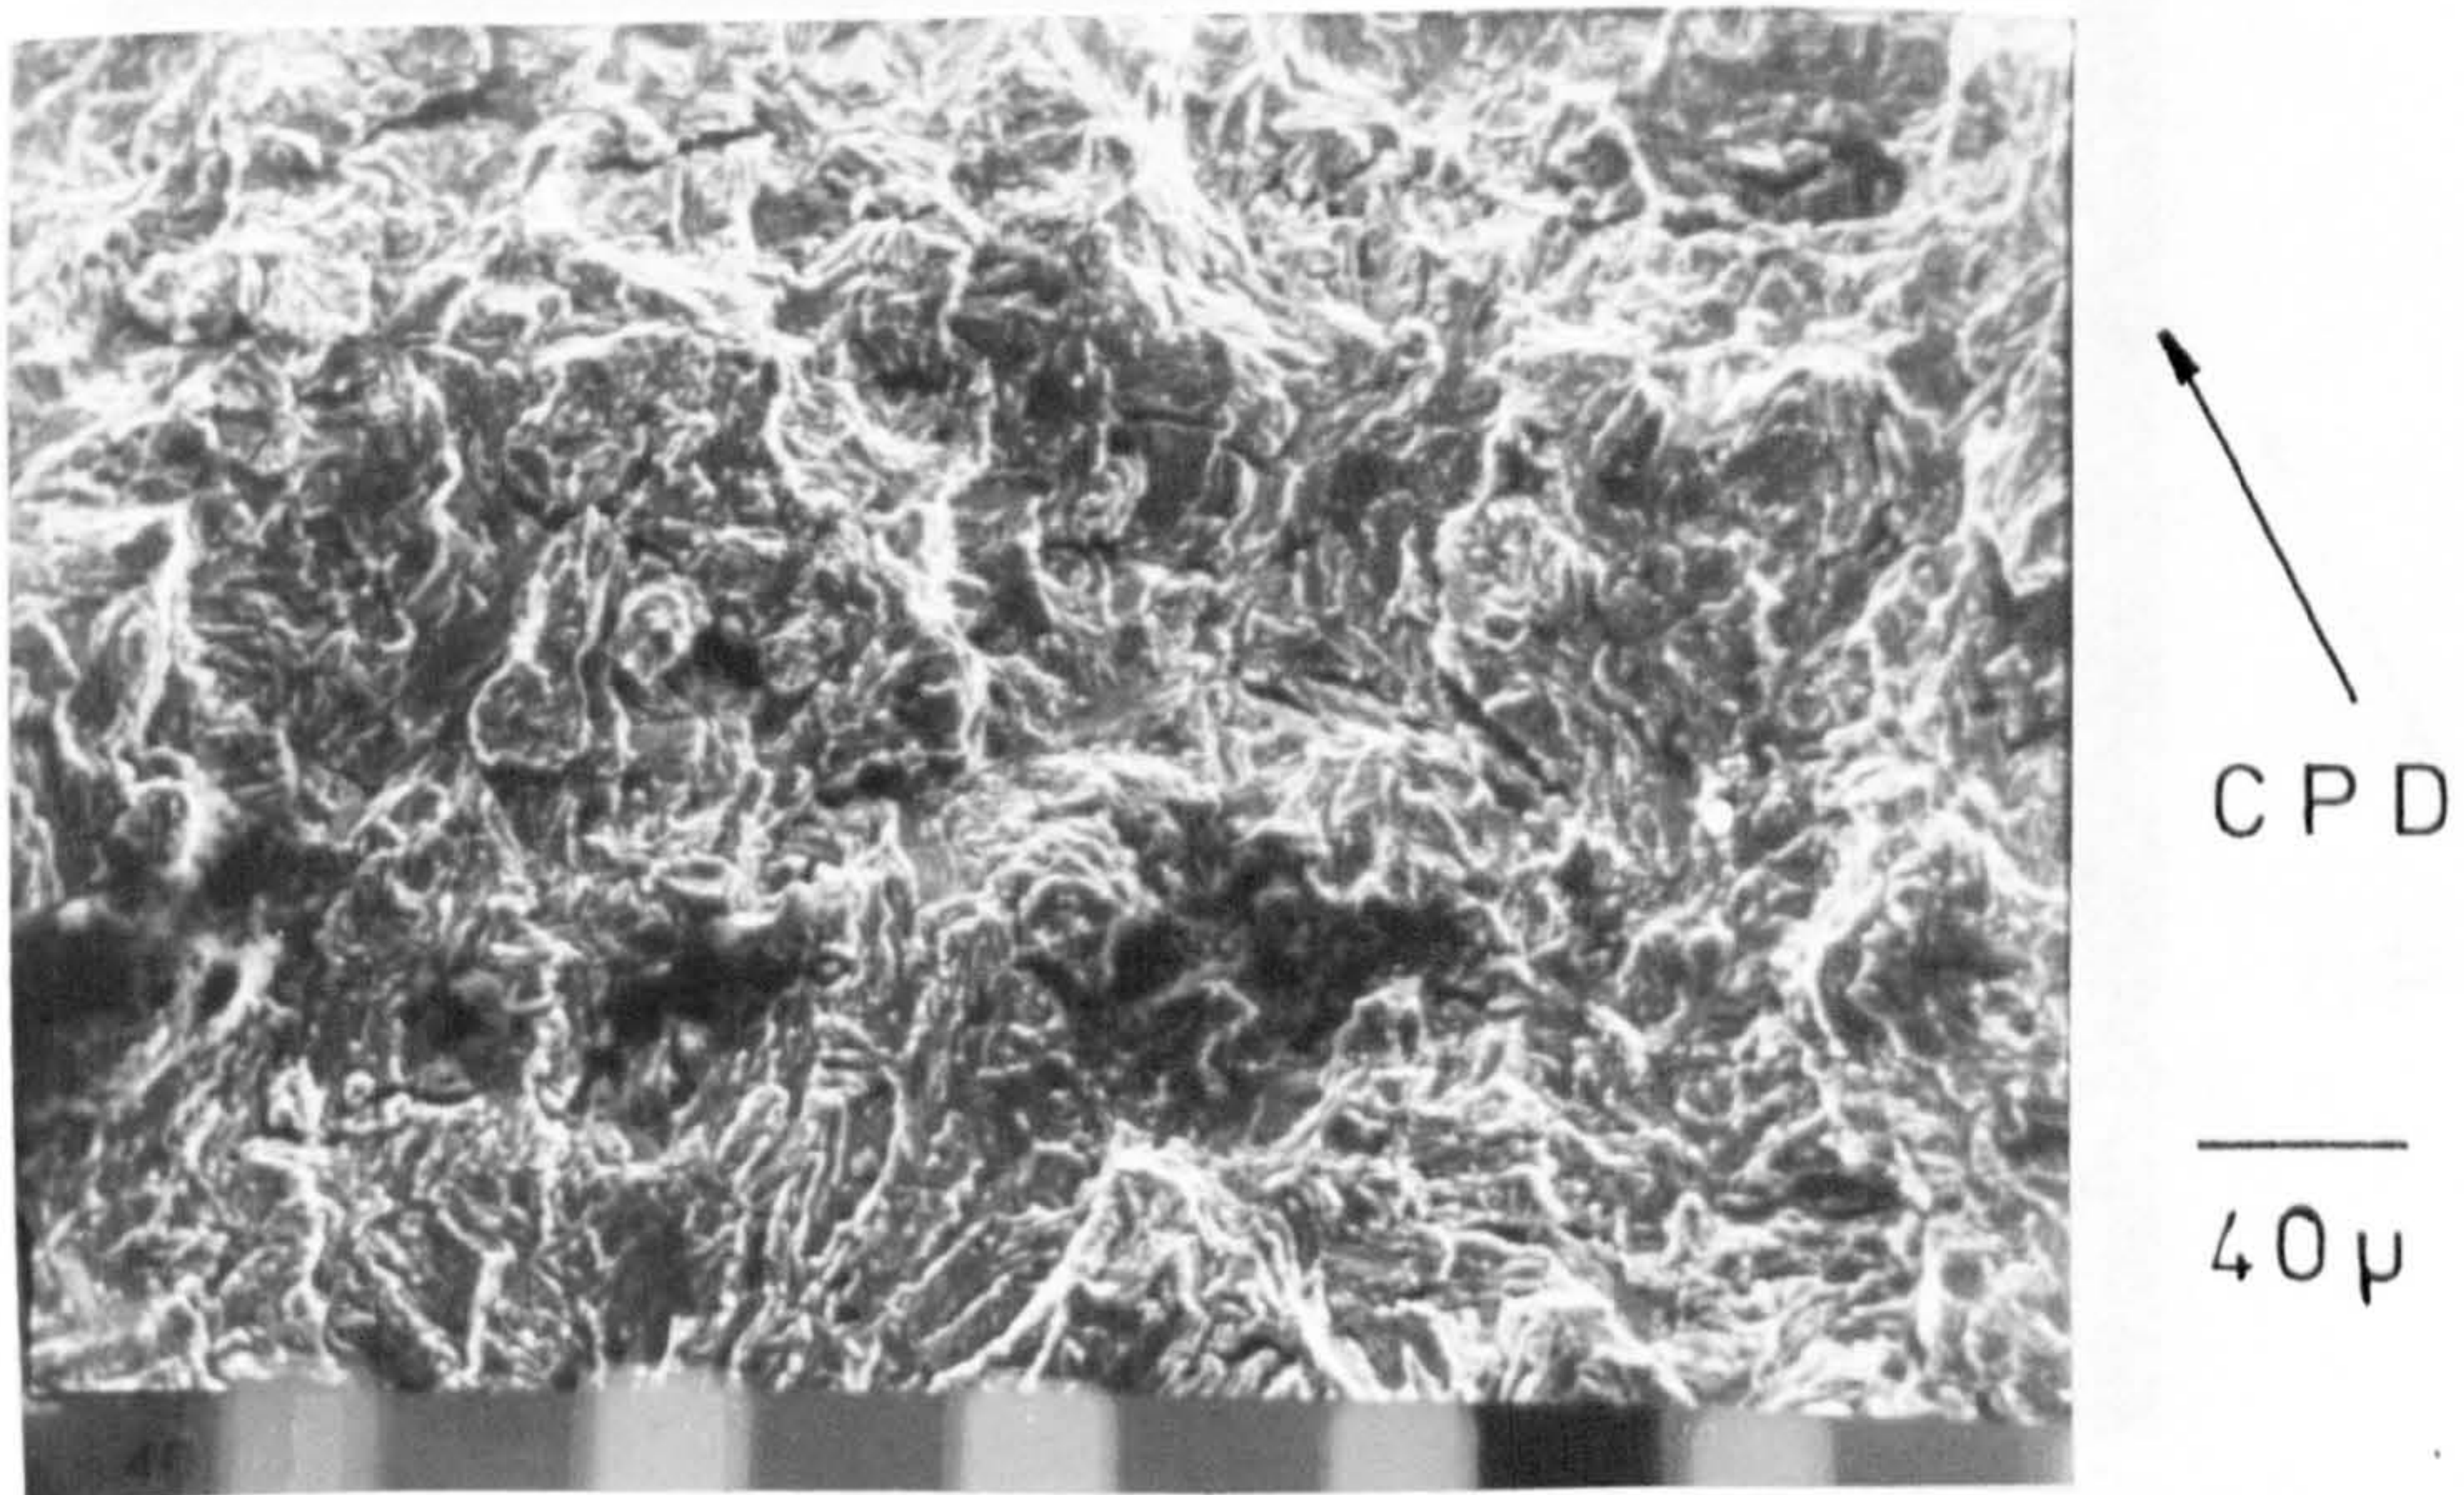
Fracture surface of heat affected zone, -1400 mV (S.C.E.), crack sides covered ($\Delta K = 34$ MPa \sqrt{m})
